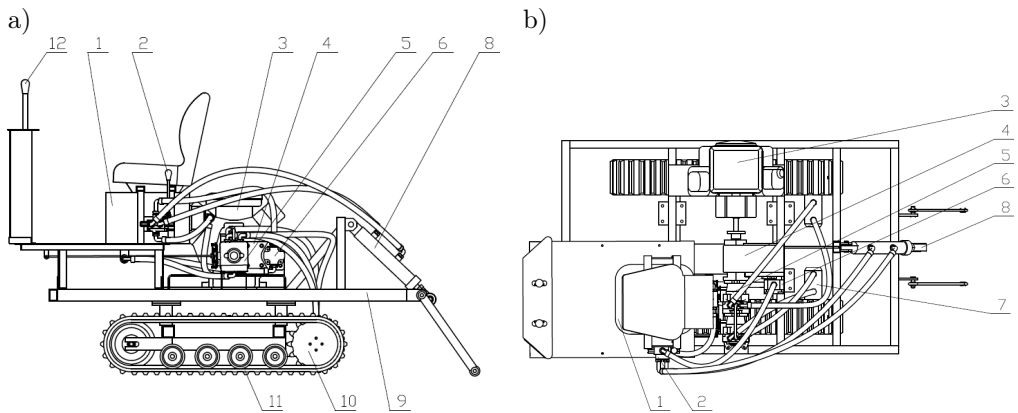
Structure diagram of the chassis: a) front view, b) top view: 1 – tank, 2 – hydraulic cylinder control valve, 3 – engine, 4 – transfer case, 5 – double pump, 6 – gear pump, 7 – motor, 8 – hydraulic cylinder, 9 – chassis support seaming, 10 – driving system, 11 – crawler, 12 – control system.
